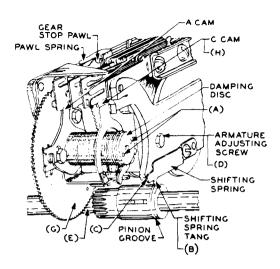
Engagement of Shifting Spring Tang and Pinion
